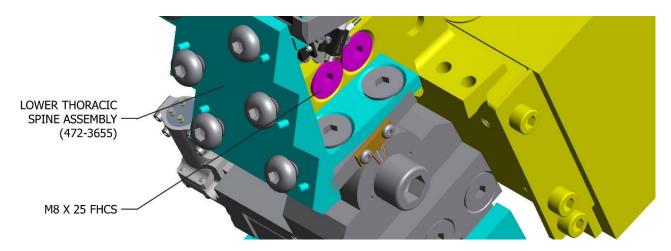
Install Upper Abdomen Assembly to Lower Thoracic Spine Assembly
